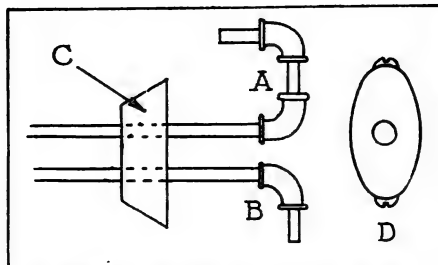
A, Garage Oil Pump; D, Brake Cam Repair.
